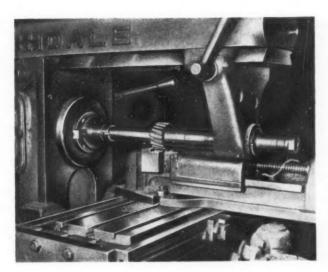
Typical set-up on a horizontal milling machine, utilizing the arbor seen at H in Fig. 1
